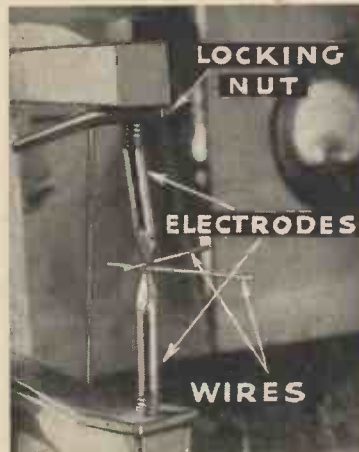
Electrodes welding two wires at right-angles.
